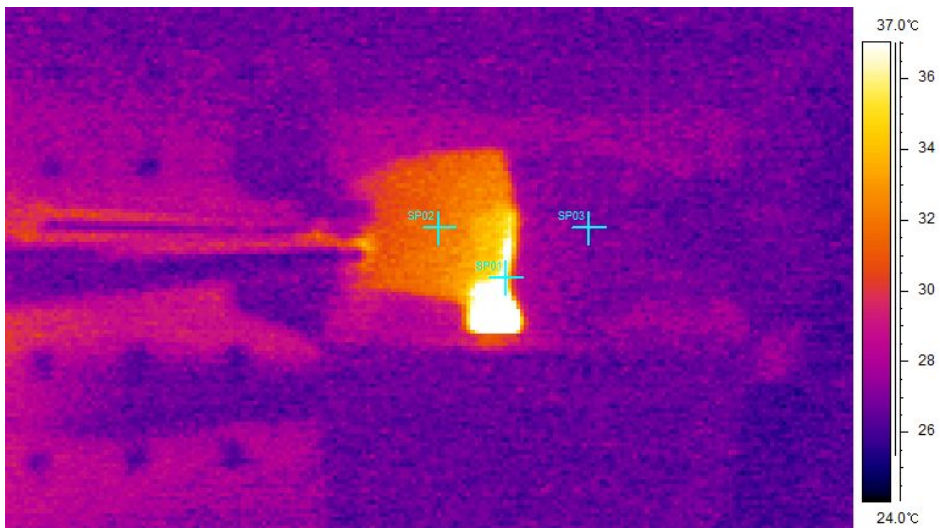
Gasoline piston skirt IR image of cutting crack
